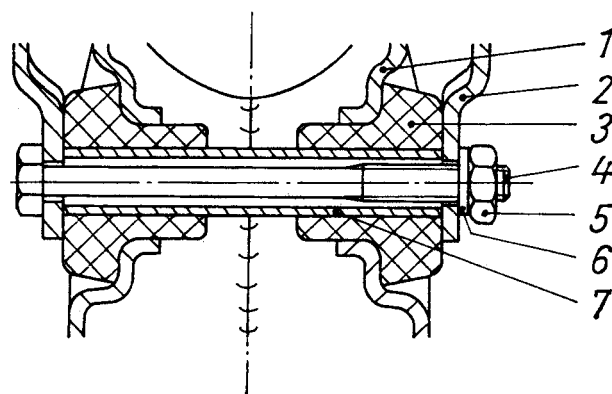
Rear fuel tank suspension at the frame (sectional view)
